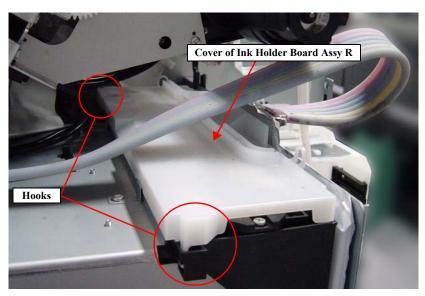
Removing the Cover of Ink Holder Board Assy R
